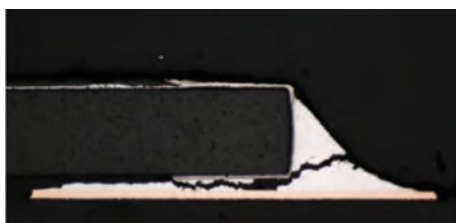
Example of Solder Cracking and Wire Bonding Crack
